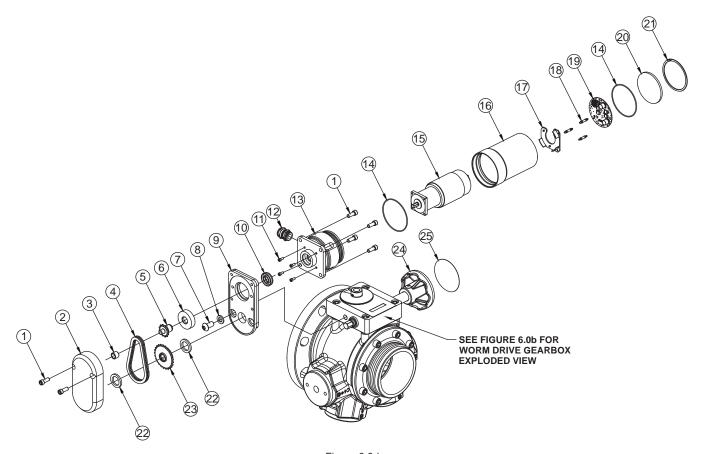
Exploded View of RC Motor Assembly for Valve Under Monitor RC
